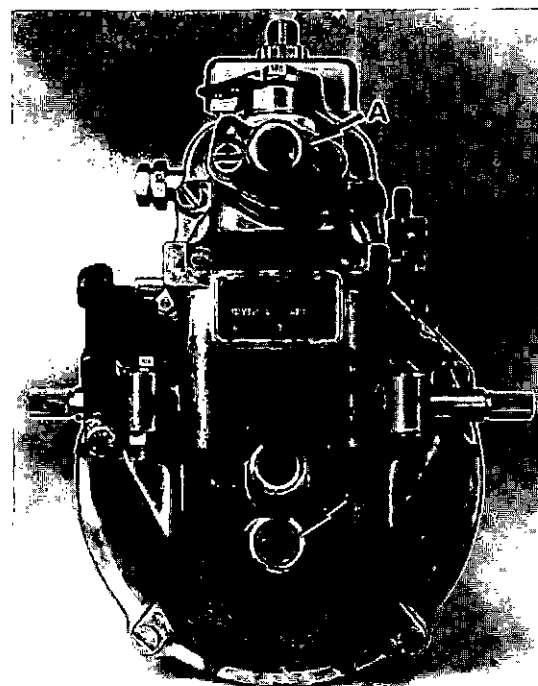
Rear cover, showing rack access 'A' guide pin 'B'
